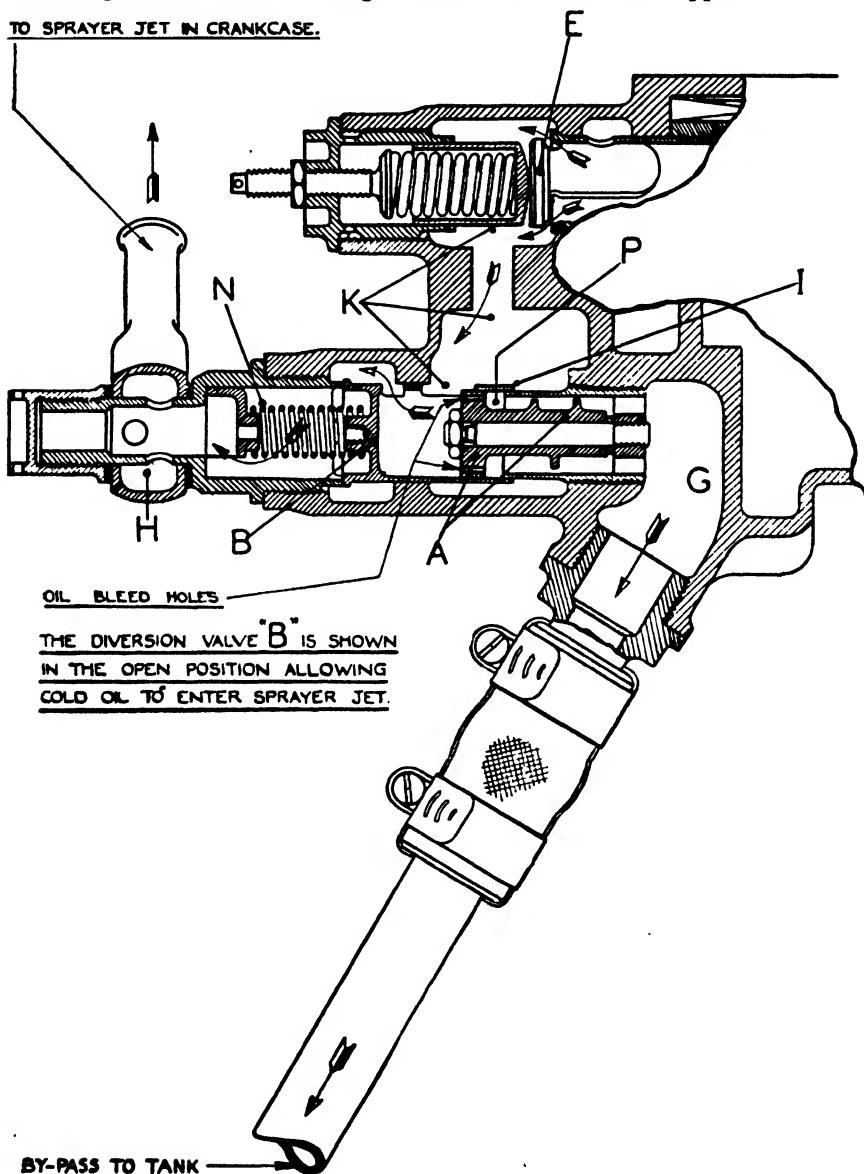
Diagram showing Oil Pump High Initial Oil Pressure Device.
